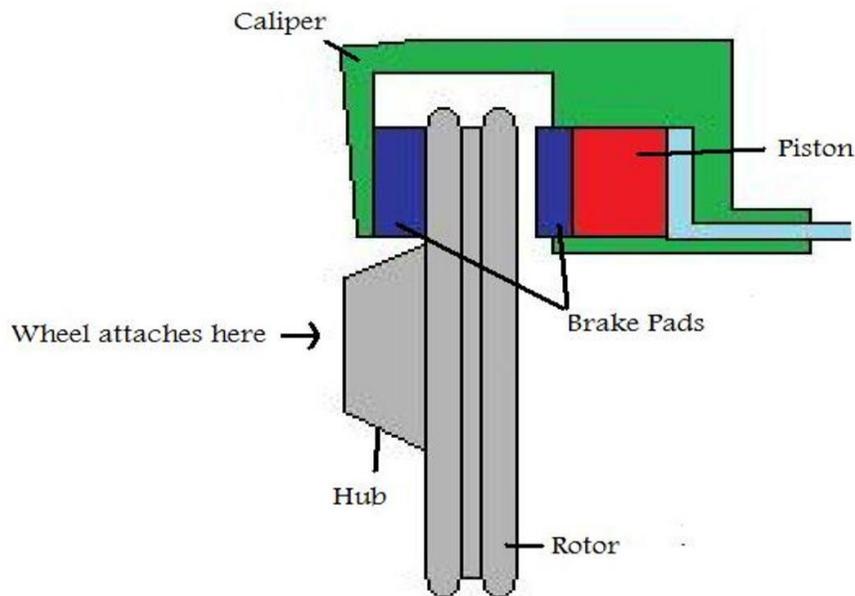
The inner pad wear that cause unequal clamping pressure [42]
